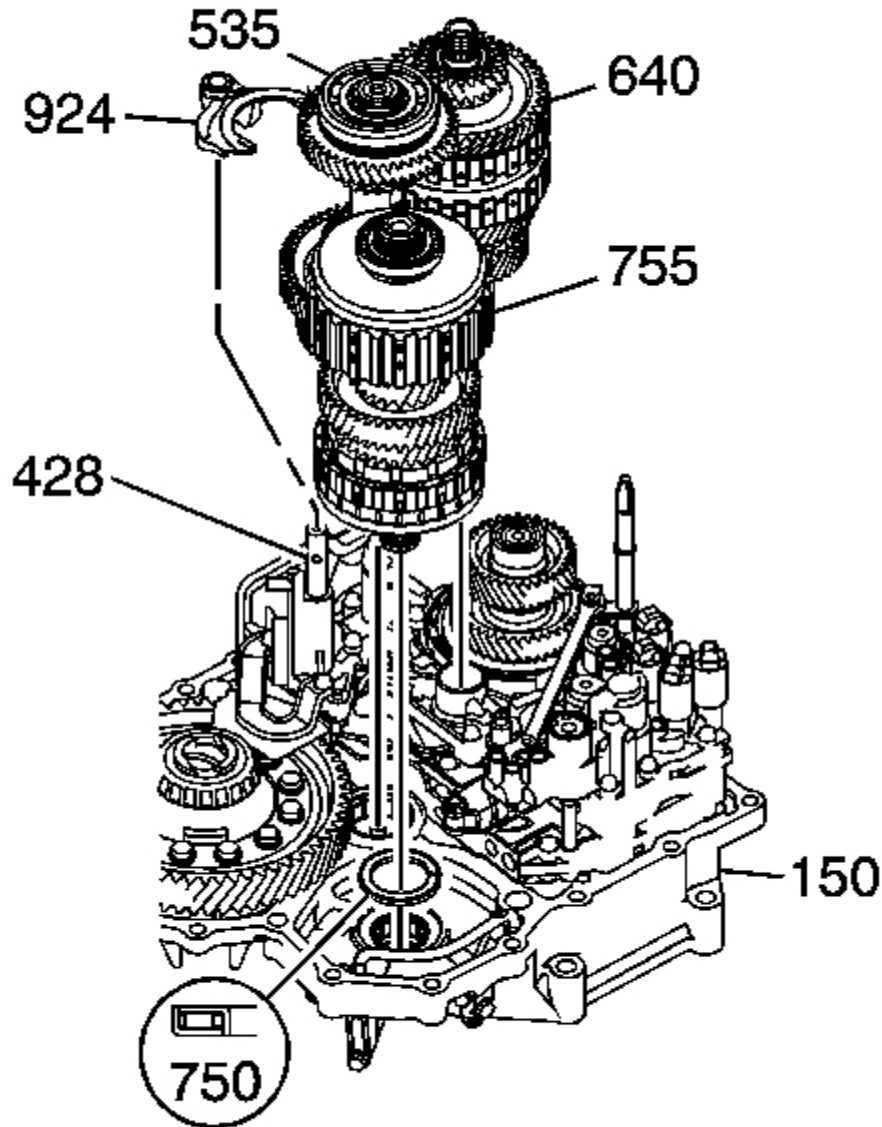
Mainshaft Complete Assembly, Output Shaft, Clutch Shaft & Torque Converter Housing
